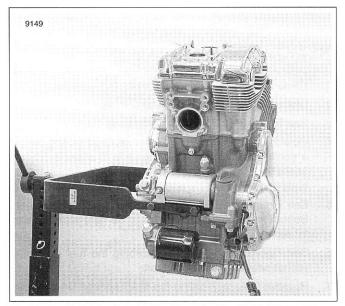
Engine In Engine Cradle (H-D 42310-40)
